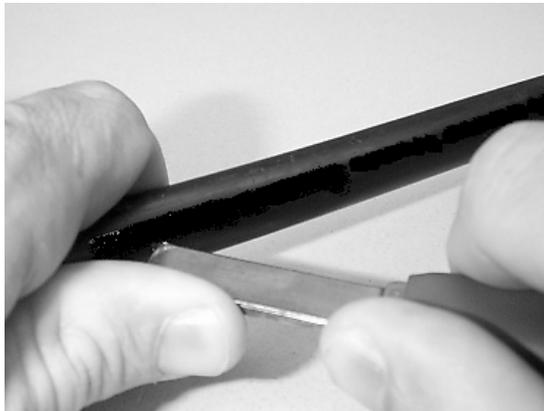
Make a longitudinal cut at the end of cable jacket.
